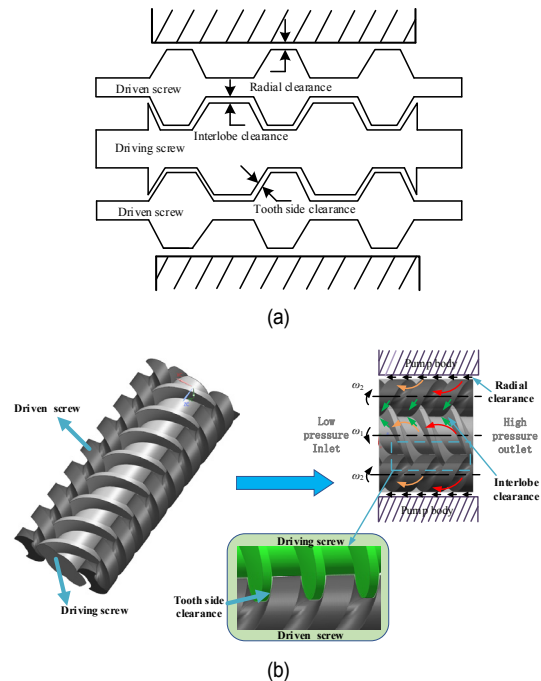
Leakage model of tri-screw pump: (a) diagrammatic sketch of leakage clearance of screw pump; (b) clearance in screw pump and leakage paths.
